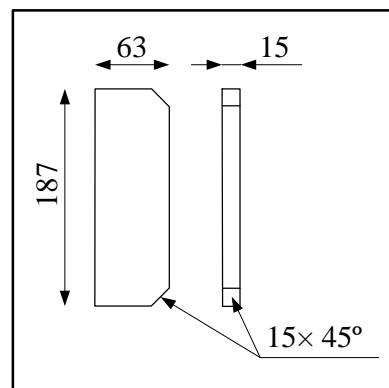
Details of the FPB welds in the column assembly - dimensions in [mm]
